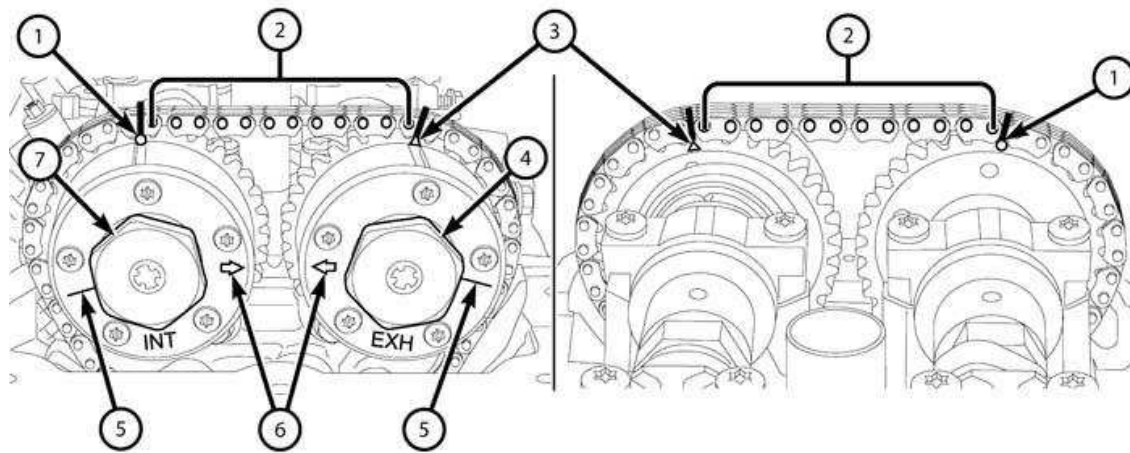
Arrows, Scribe Lines & Cylinder Head Cover Mounting Surface
